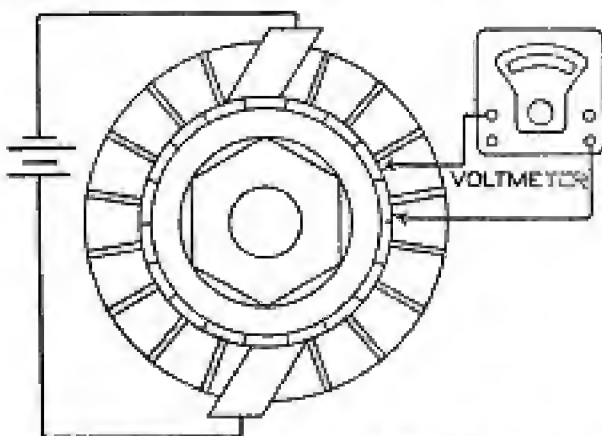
Connecting a Voltmeter and Current to a Commutator to Test Out for a Short-Circuited Coil rocker arm, and thus short-circuit the machine.
